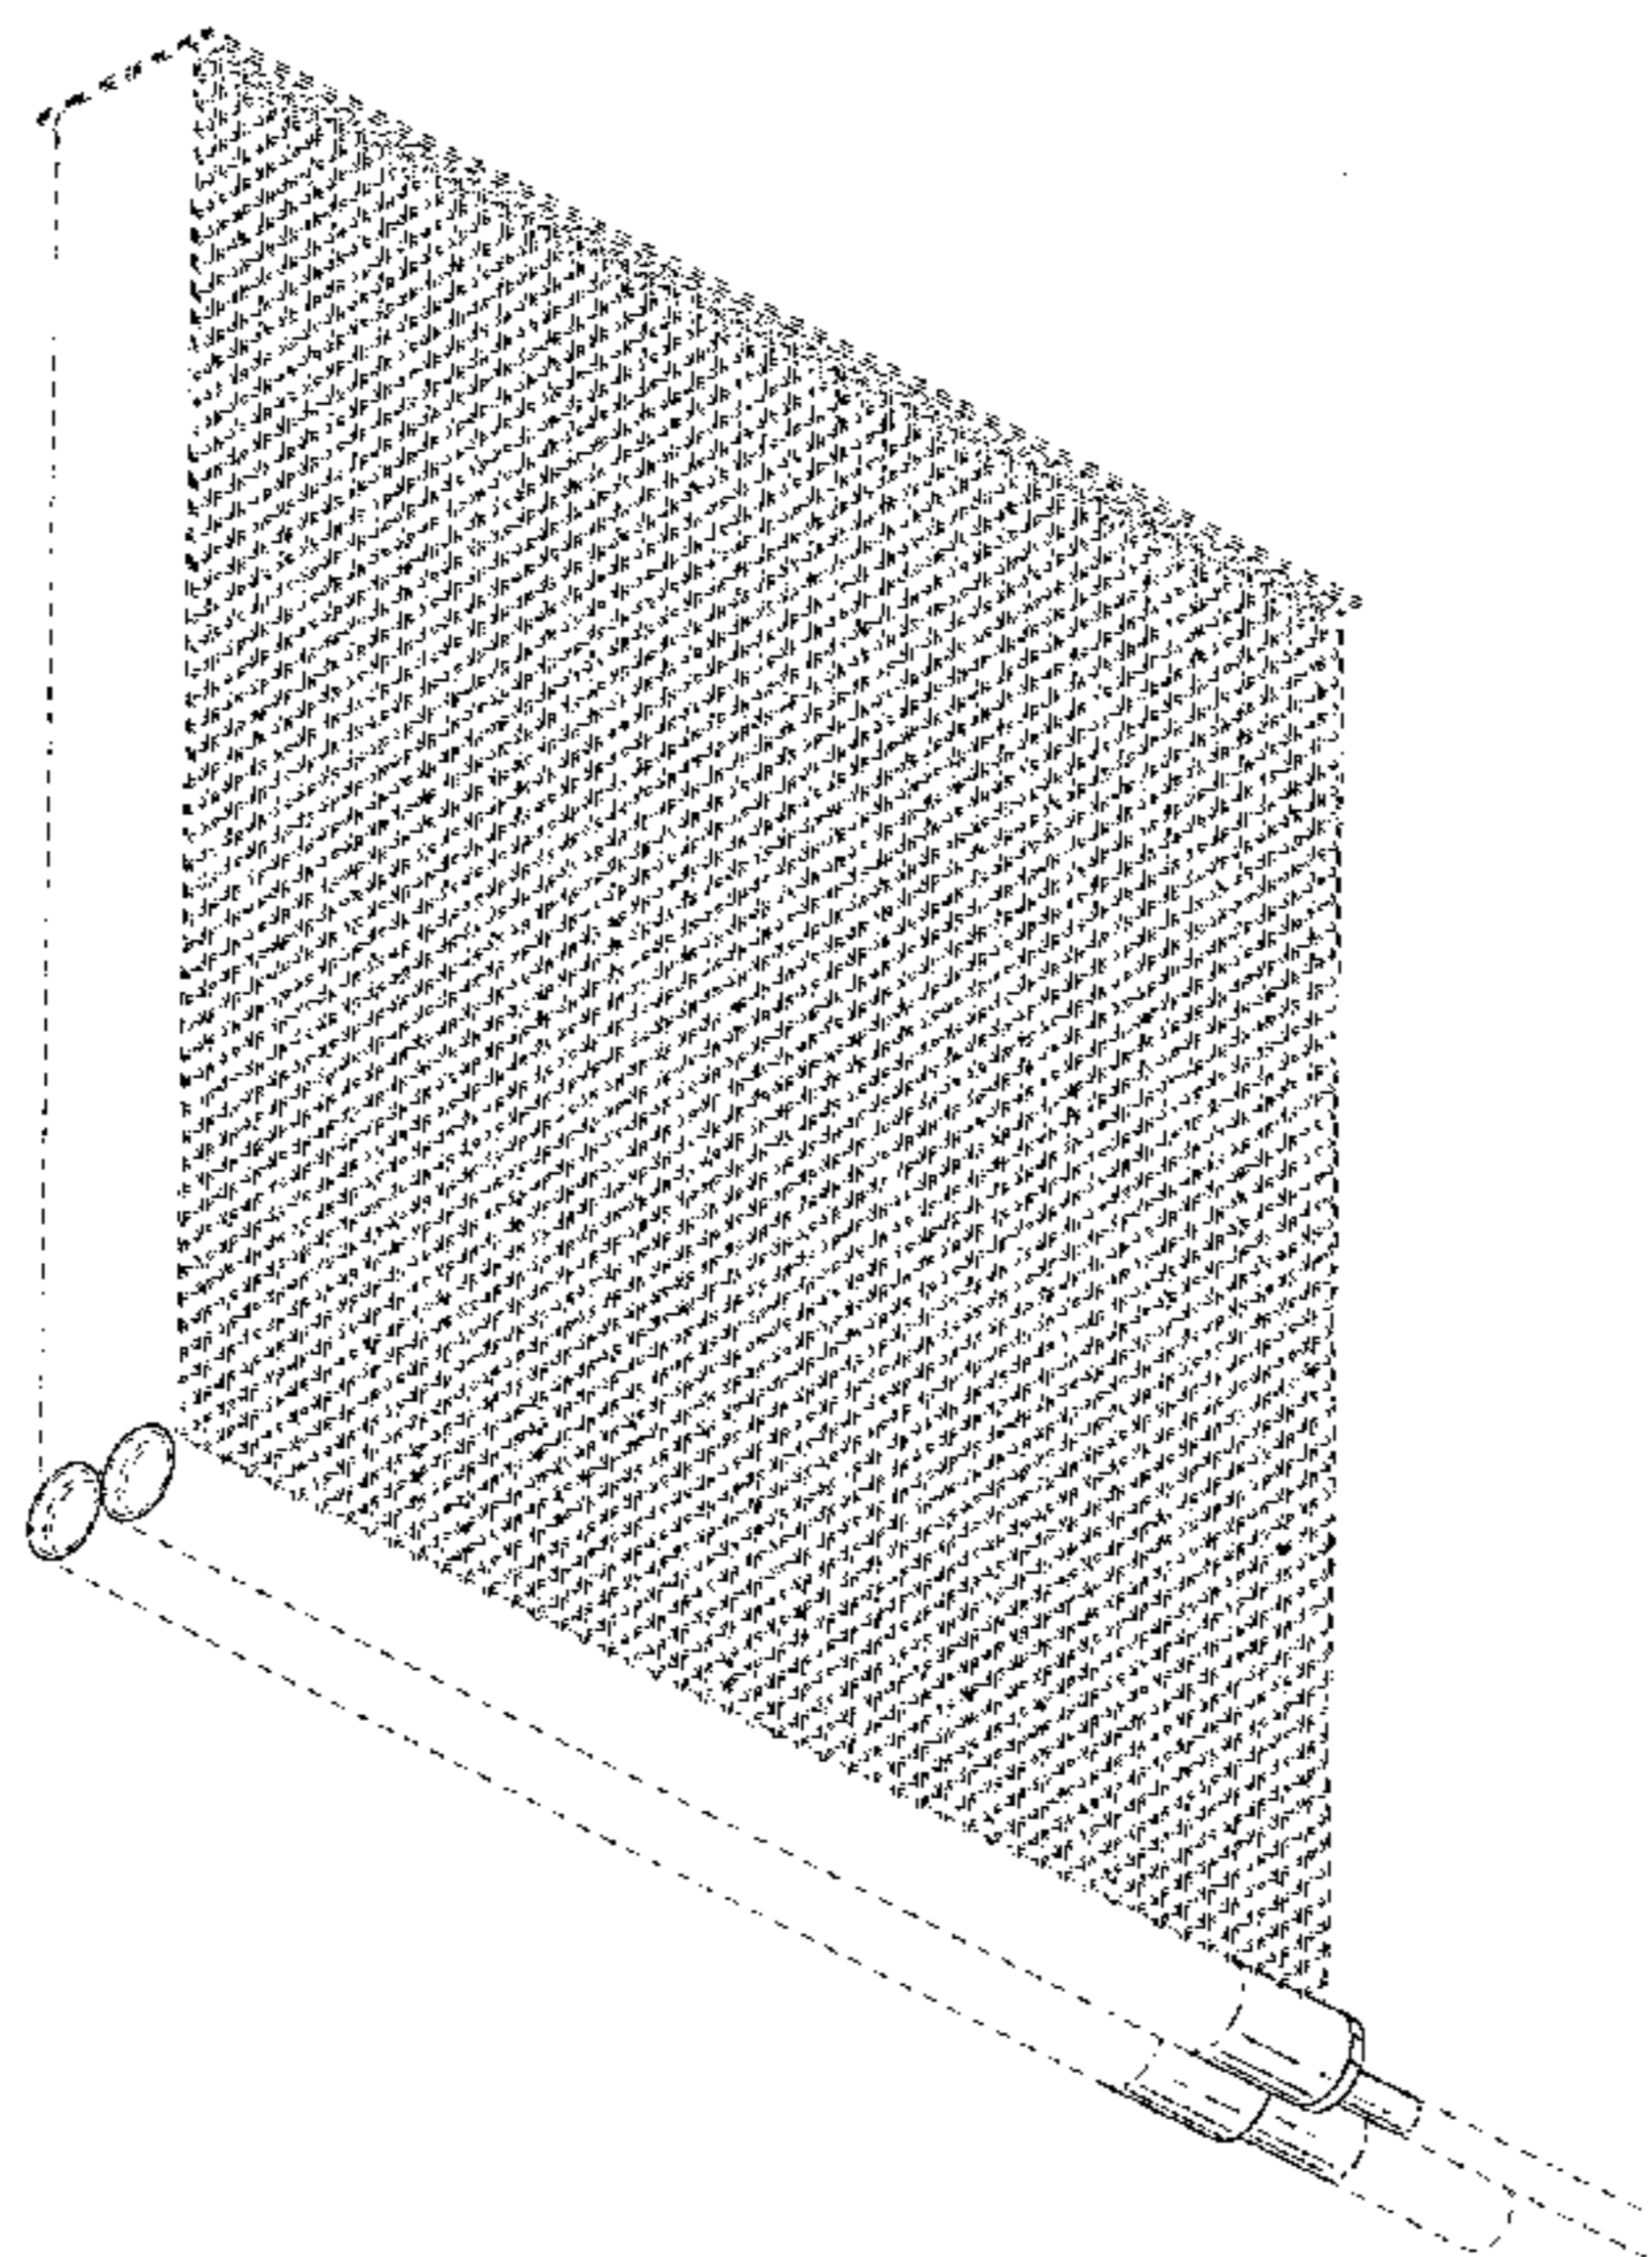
is a rear view of the heat exchanger shown in FIG. 1; and,
